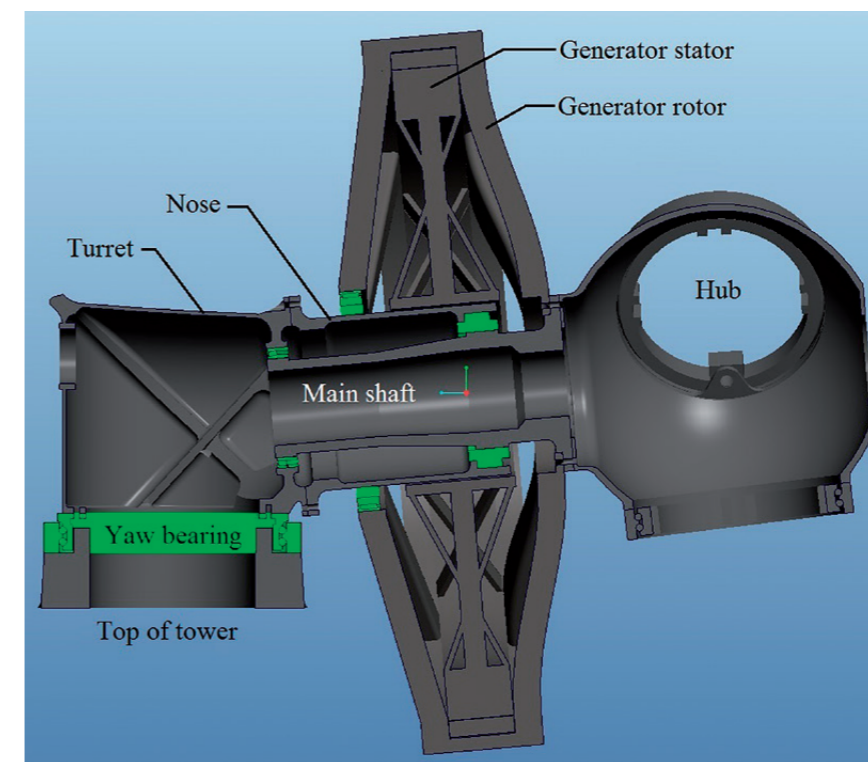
A cutaway view of the nacelle, main shaft, hub, and generator
